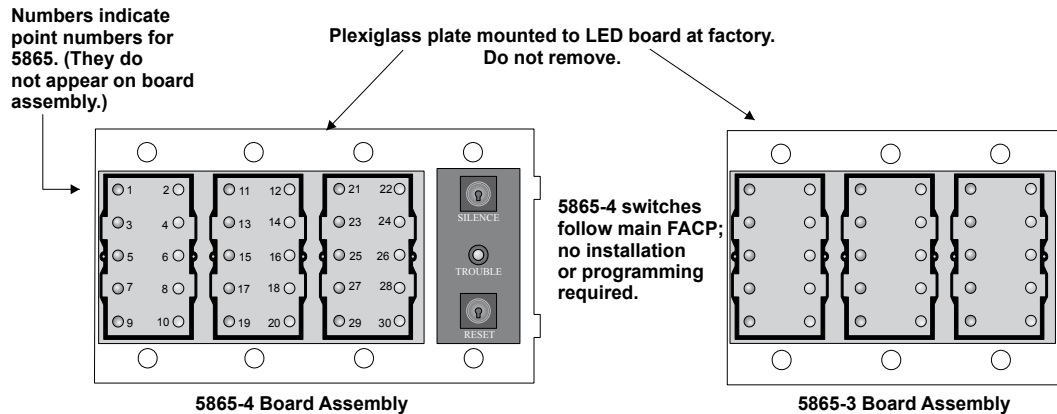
5865-3 and 5865-4 Assembly (front view)
